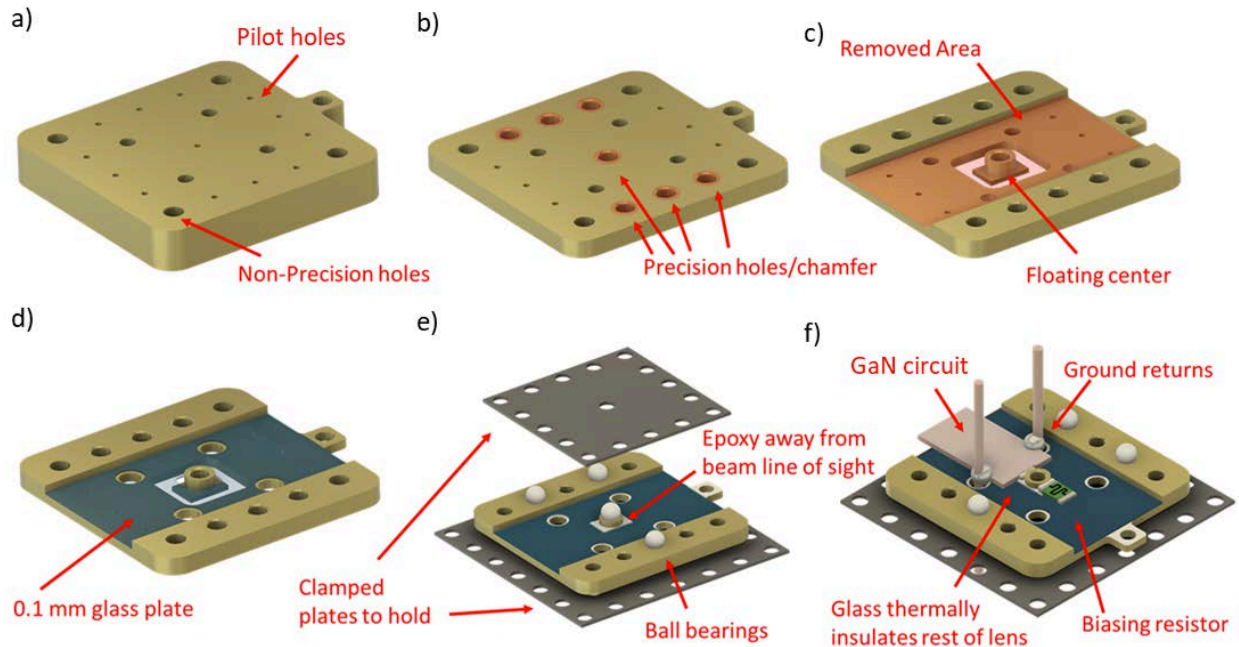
Optimized gated electron mirror fabrication. (a) First, we use a water jet cutter to cut out the stock and drill pilot and fixture holes. (b) Next, we use precision bits to drill out and chamfer critical holes for the ball bearings and center electrode. (c) Using a mill, we then separate out the center electrode from the stock, and mill a recess, not machining the center hole or ball bearing holes. (d) After this we place a thin Pyrex glass sheet onto the mirror recess, which was also water jet cut. (e) We next place the center electrode into the middle, held onto the glass plate gently by the wet epoxy. We then place the ball bearings onto their holes, and clamp the mirror between two plates. This holds the center electrode in place while it dries. (f) Finally, we attach the GaNFET circuit and solder on the ground returns and biasing resistor. The whole part is sonicated in acetone and IPA for 15 minutes each.
